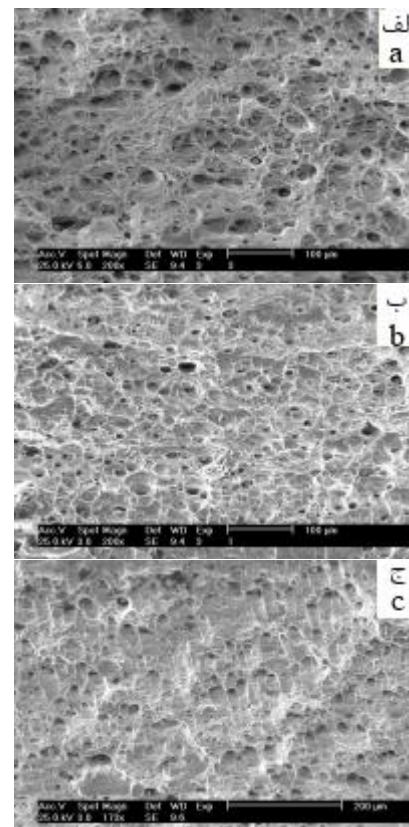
Fracturegraph of tensile testing samples a)In625 b)In82 c)In61
